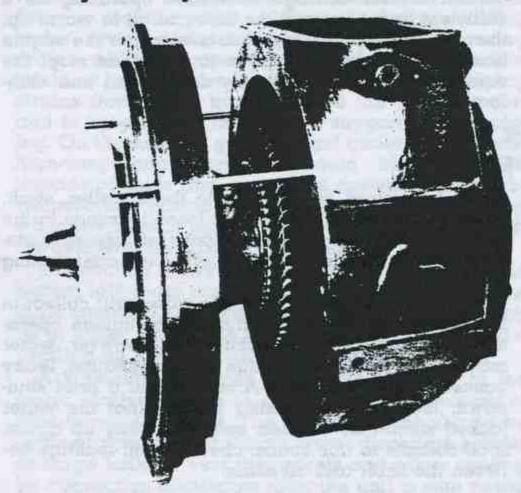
Intermediate and Turbine Casing—Method of Assembly and Disassembly.
